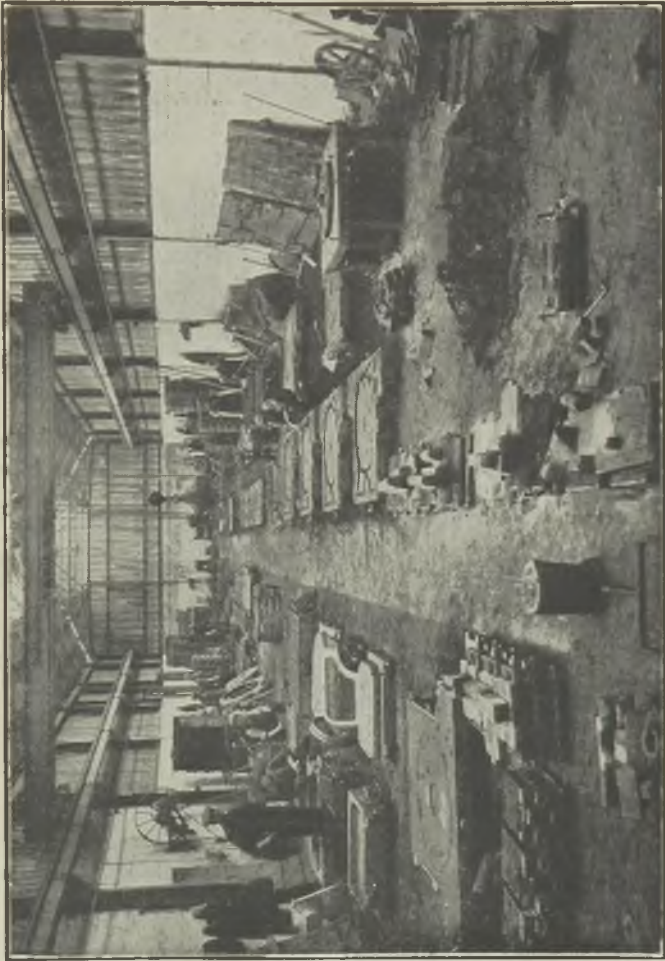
GREEN-SAND MOULDS FOR WASHING MACHINE OUTSIDE ENDS.
